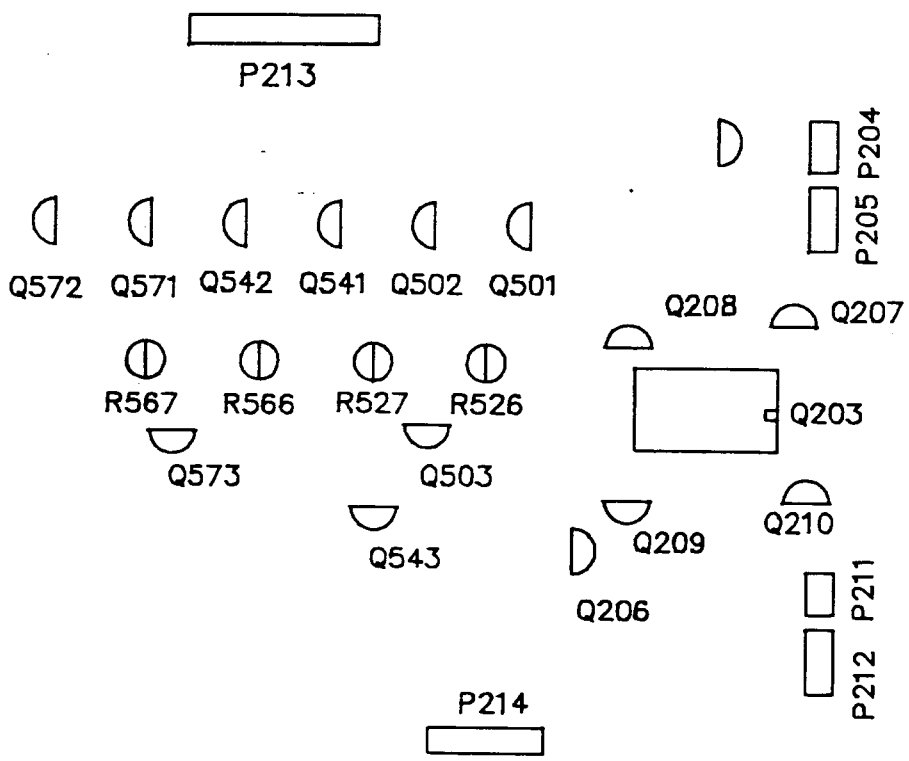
PCB-VIDEO DRIVE adjustment and test location
